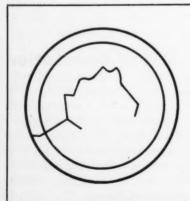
Sketch of acid crucible shows how casting failed in service. General shape is shown in cross-sectional view, Fig. 6.
